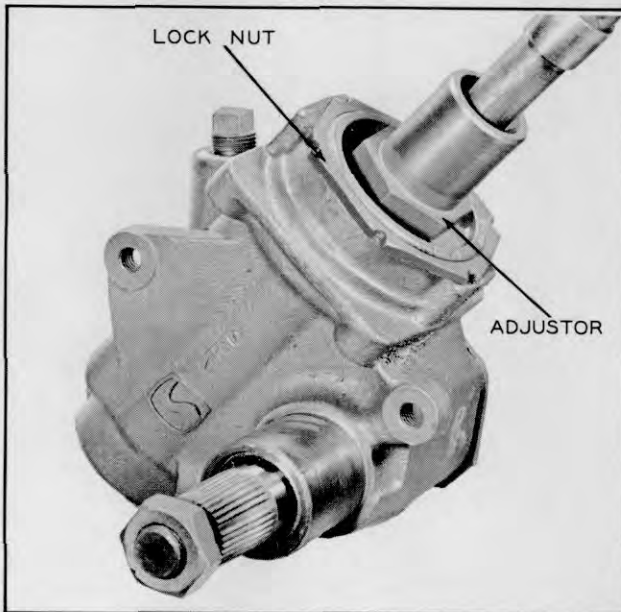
Steering Gear Thrust Adjustment (Worm Bearings)
